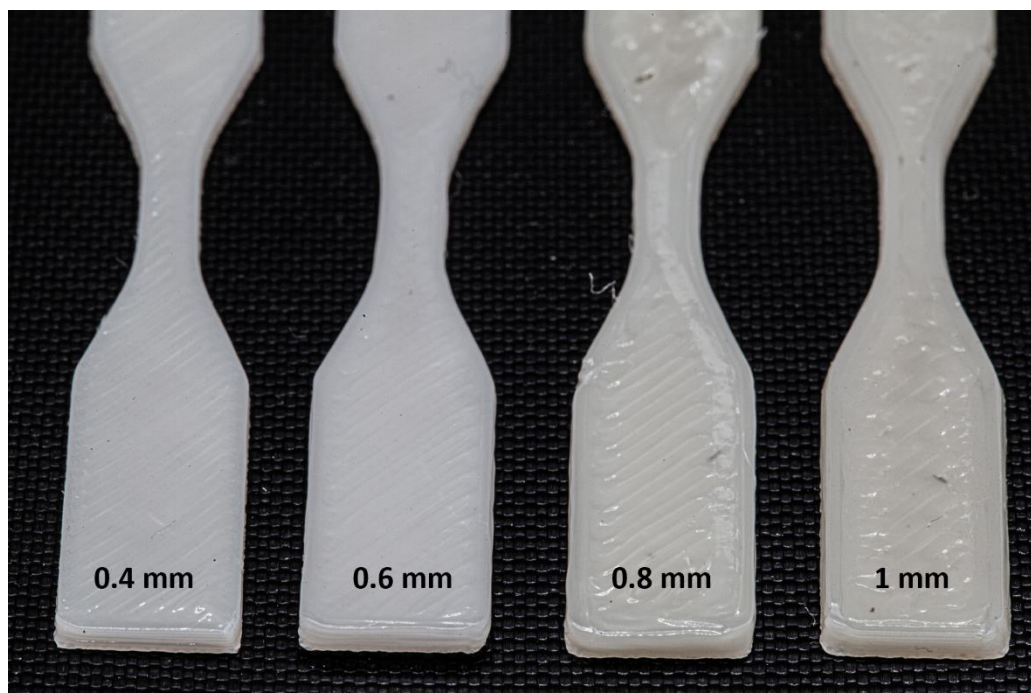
Printed ASTM D638 type V shaped objects using 0.4 to 1 mm nozzle sizes.
